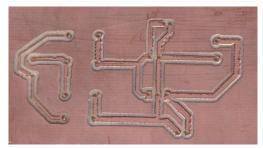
Circuit board full-depth milled using single-sided copper-clad laminate.
